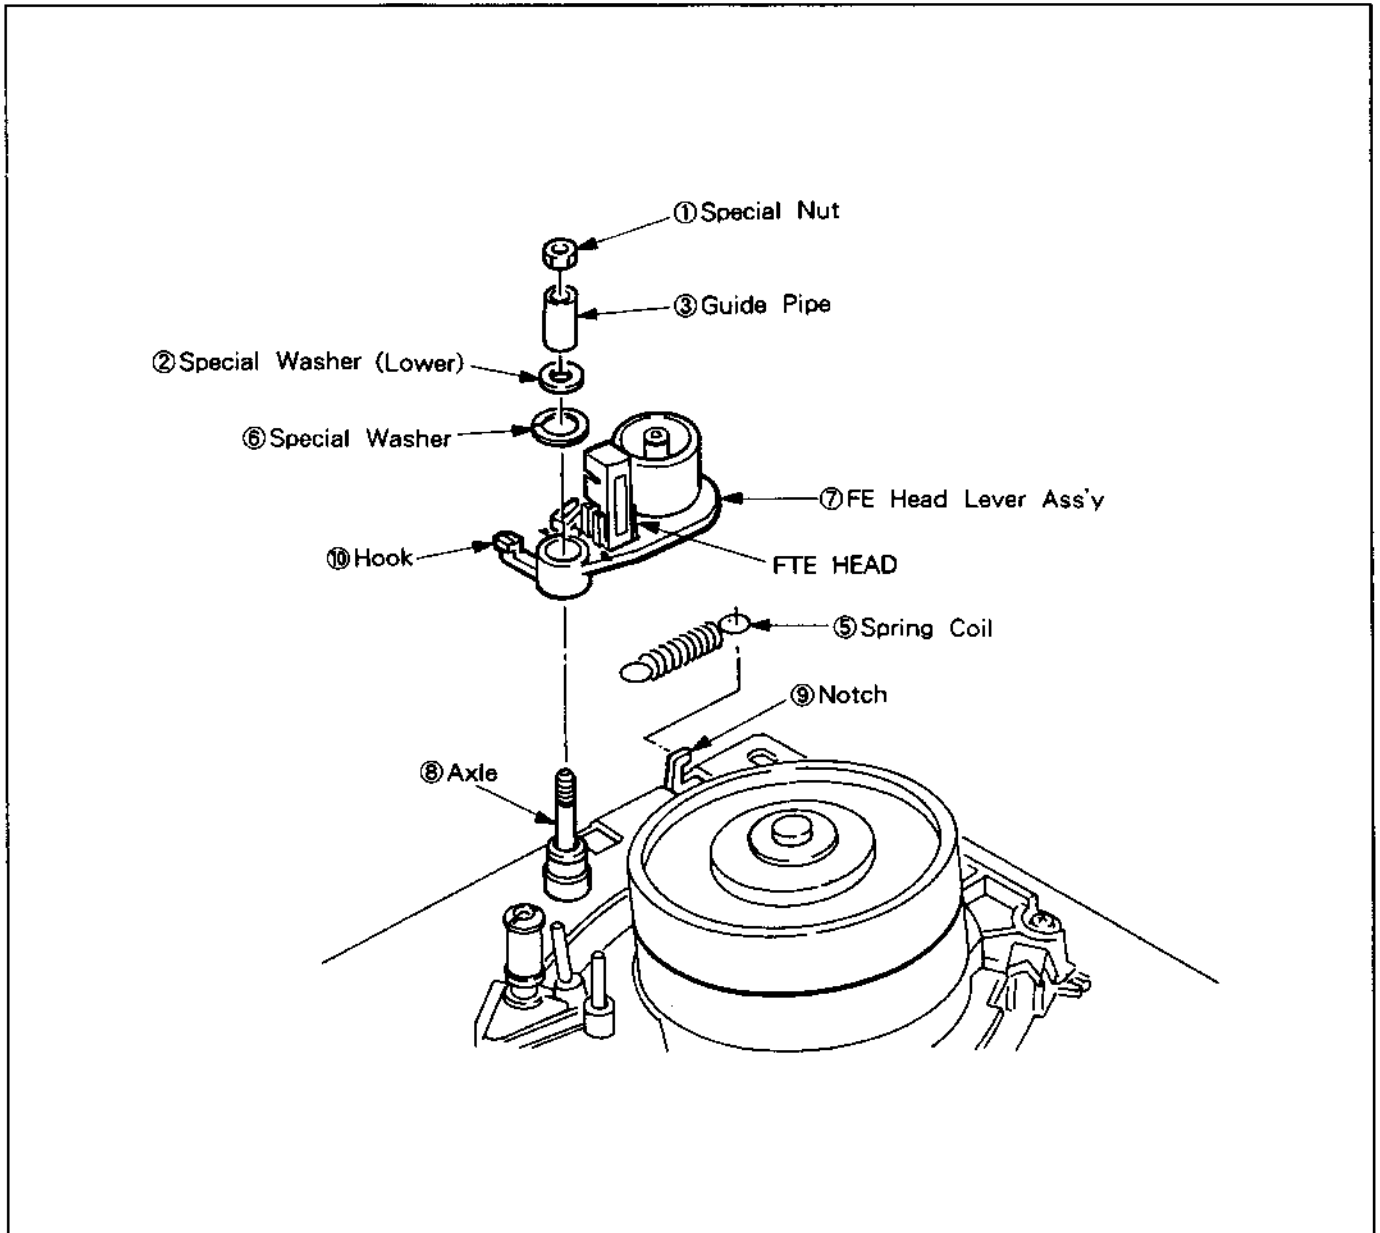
Fixed Guide (S) & FE Lever Ass'y
